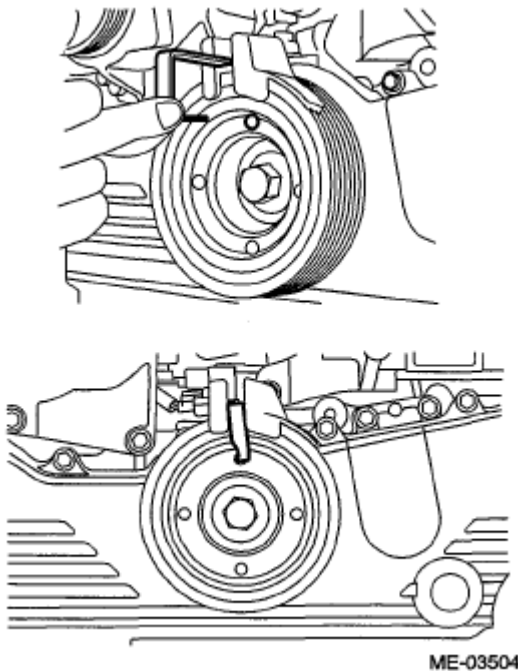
Inserting Belt Guide Holder Into Crank Pulley Service Hole
